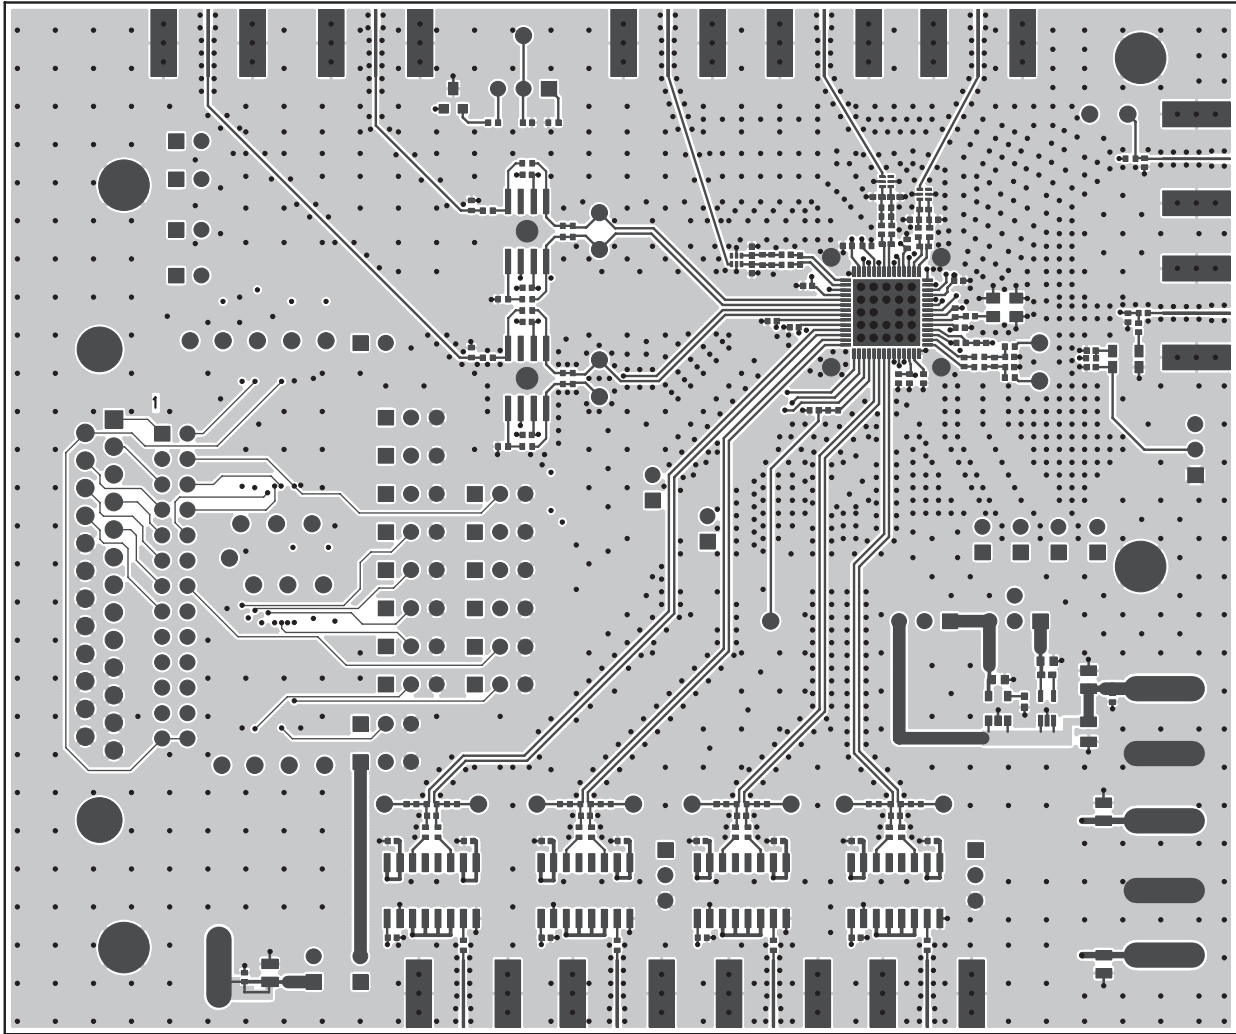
MAX2839AS EV Kit PCB Layout—Component Side
